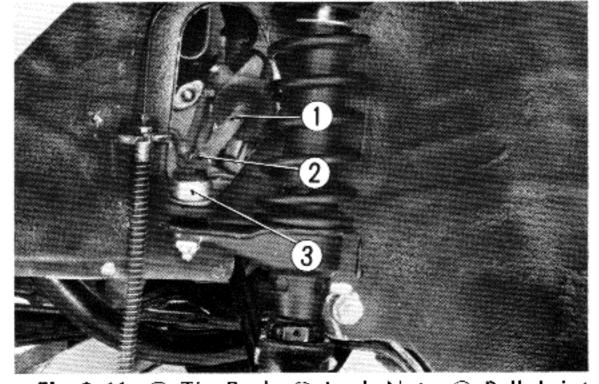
① Tie Rod ② Lock Nut ③ Ball Joint
